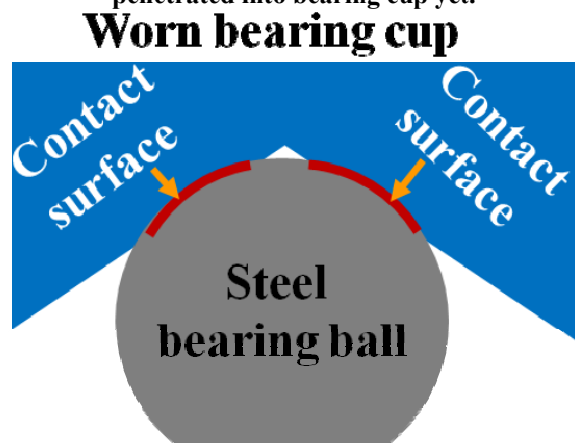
Worn out bearing: Contact area has increased due to material removal and resulting axial penetration of bearing ball into bearing cup.
